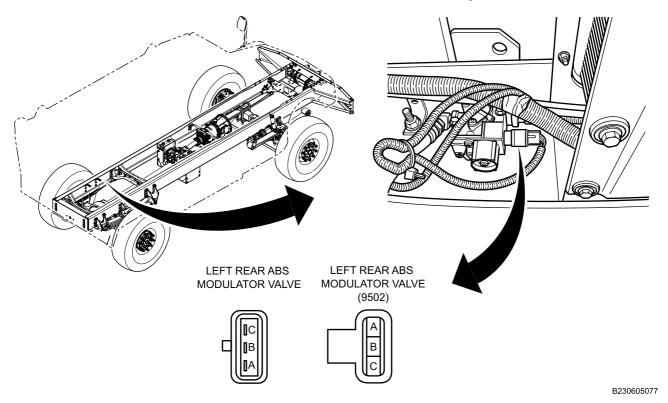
Inboard Left Frame Rail Near Left Rear Wheel.
